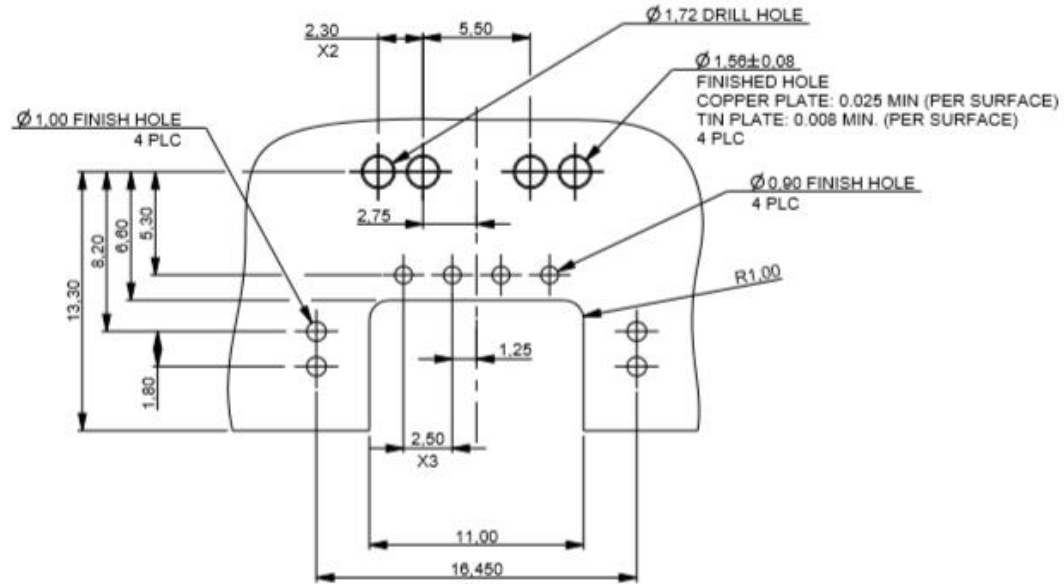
48VHPWR Right Angle Through-Hole Header Recommended PCB Footprint
